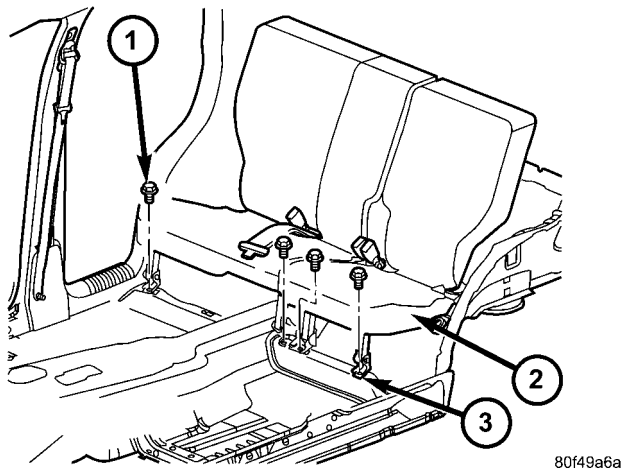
REAR SEAT - FRONT ATTACHMENTS
